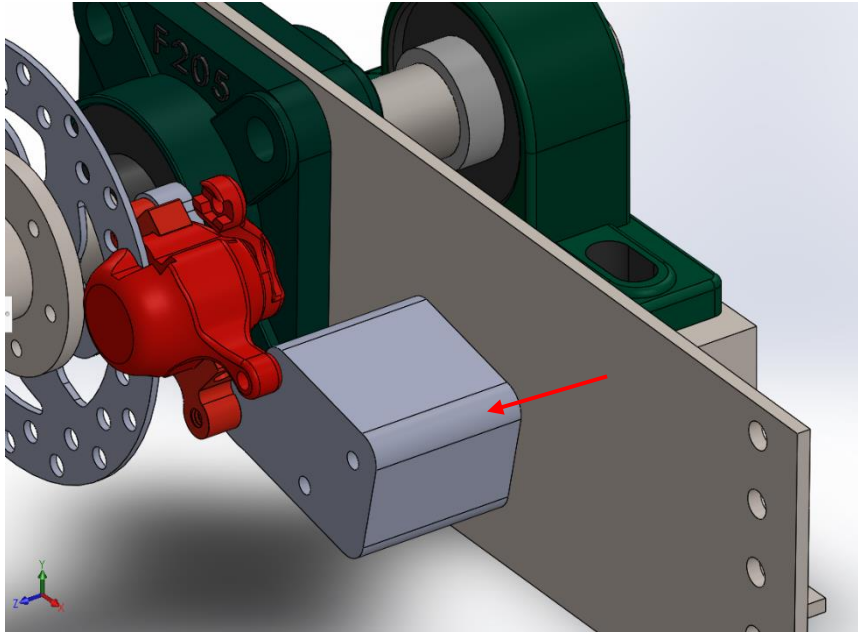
overview of the brake module assembly with highlight on the 3D printed plastic junction
